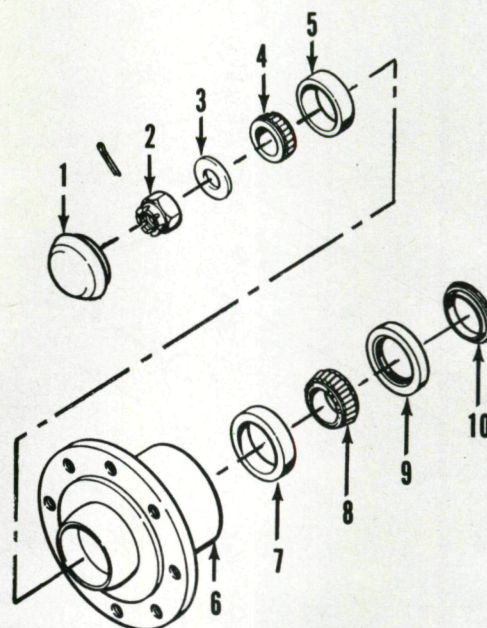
Exploded view of wheel hub and bearing assembly used on all two-wheel drive tractors.
